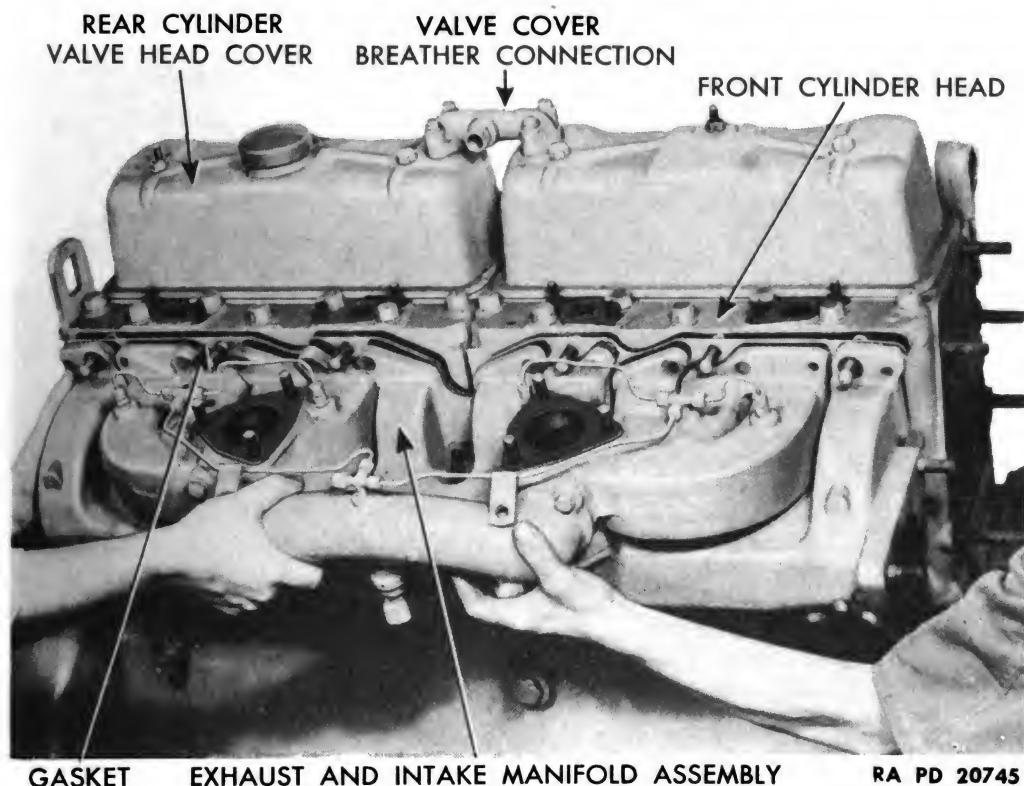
Removing Exhaust and Intake Manifold Assembly
